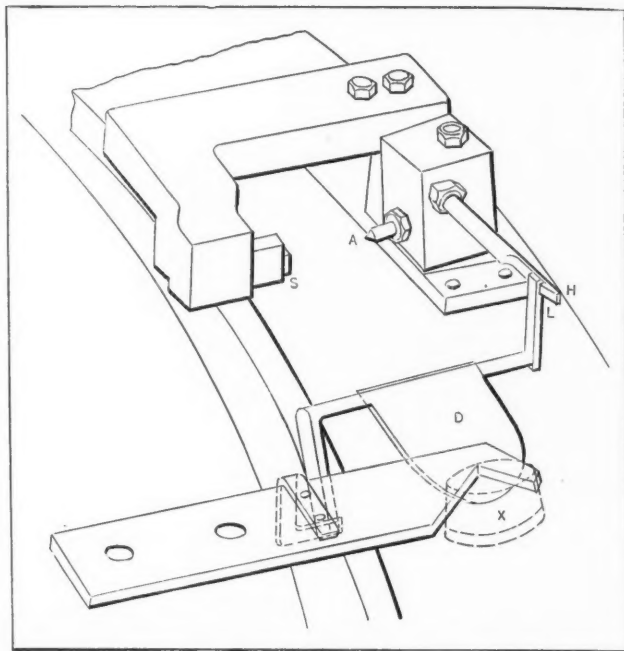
Size-gaging Fixture Using Pivoted Contact Point
